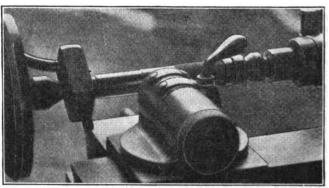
FINISH-TURNING OUTSIDE OF BARRELS
